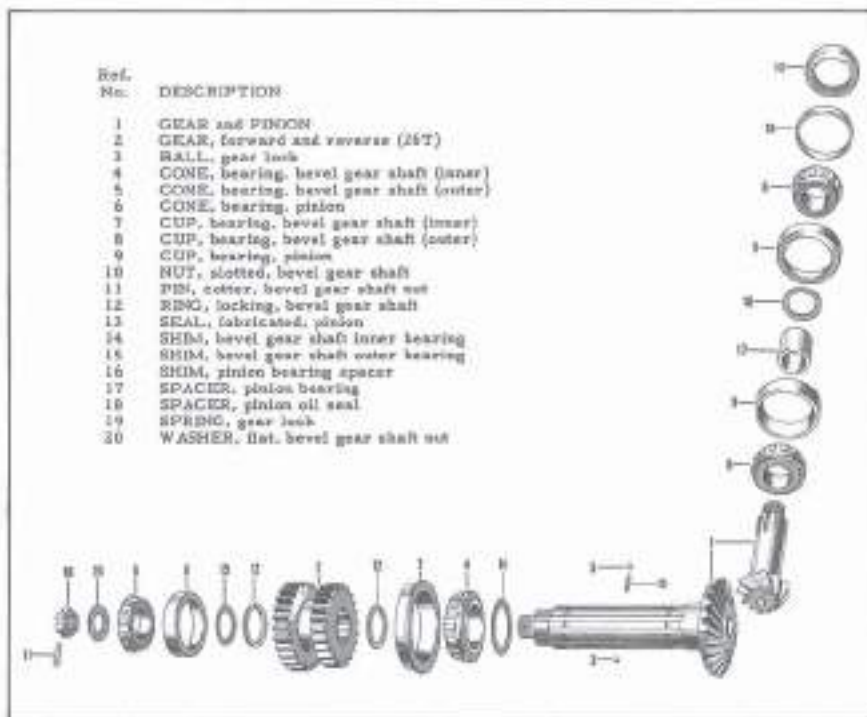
Bevel Drive Pinion and Gear - Exploded View
